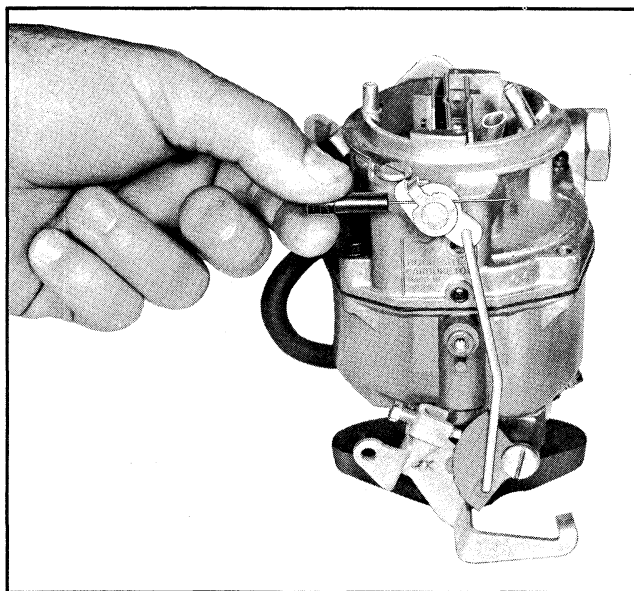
B-29 Trip Lever and Choke Rod Lever Clearance
